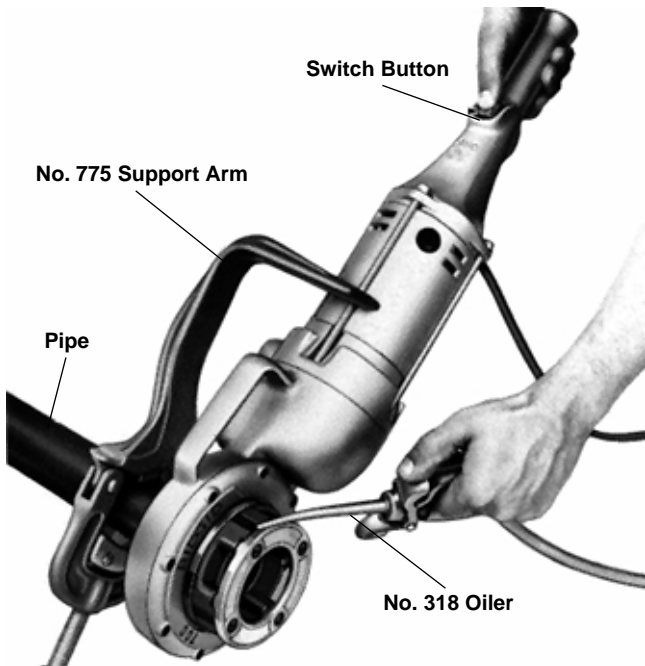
Threading 2" Pipe without Tri-stand Vise
